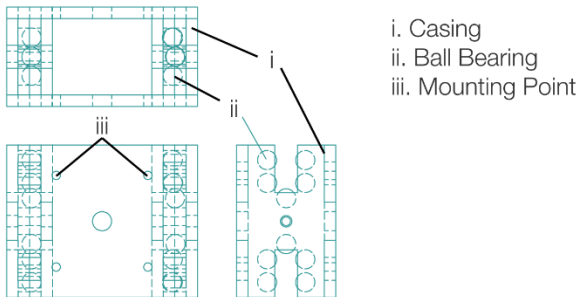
Initial Printing Apparatus General Arrangement Drawing
